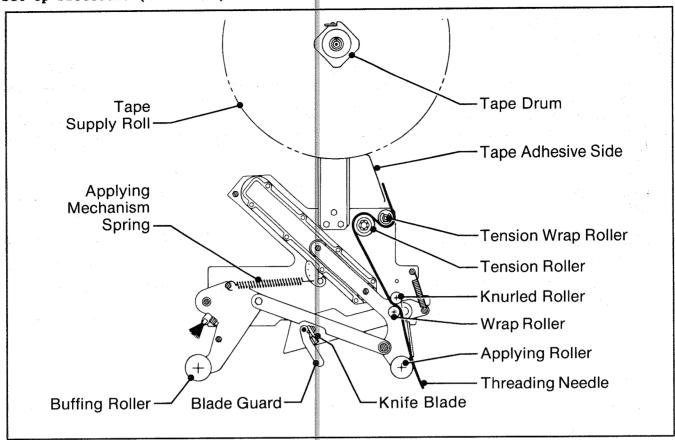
Tape Threading Diagram - Top Taping Head - Left Side View
